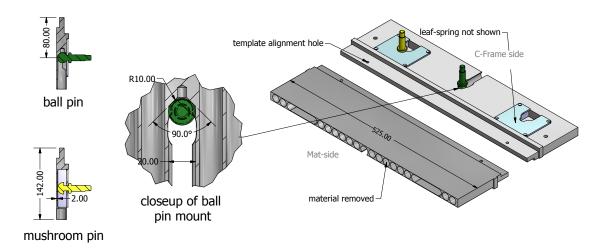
An illustrative drawing of the C-Frame mounting endplug. Construction drawings can be found on EDMS.
